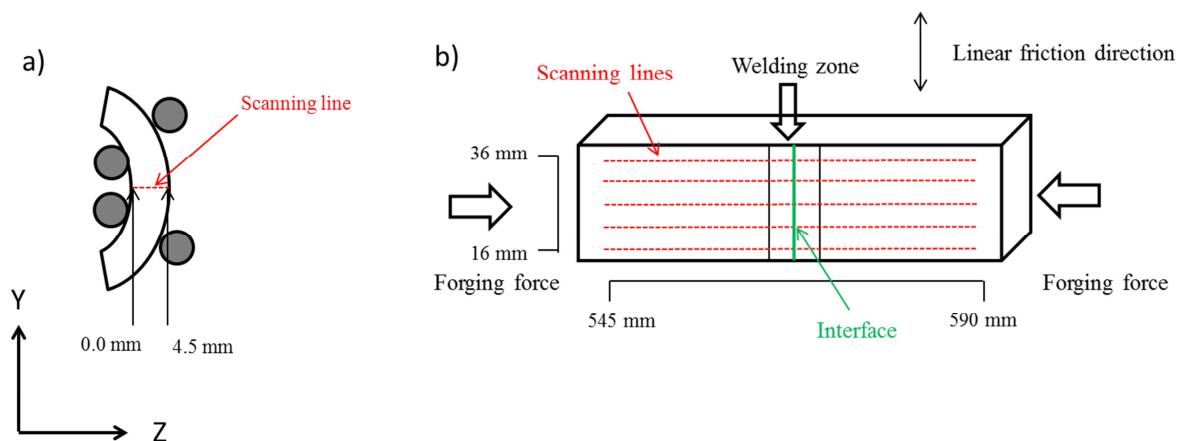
(a) A four-point bent beam and (b) a linear friction welding assembly.
